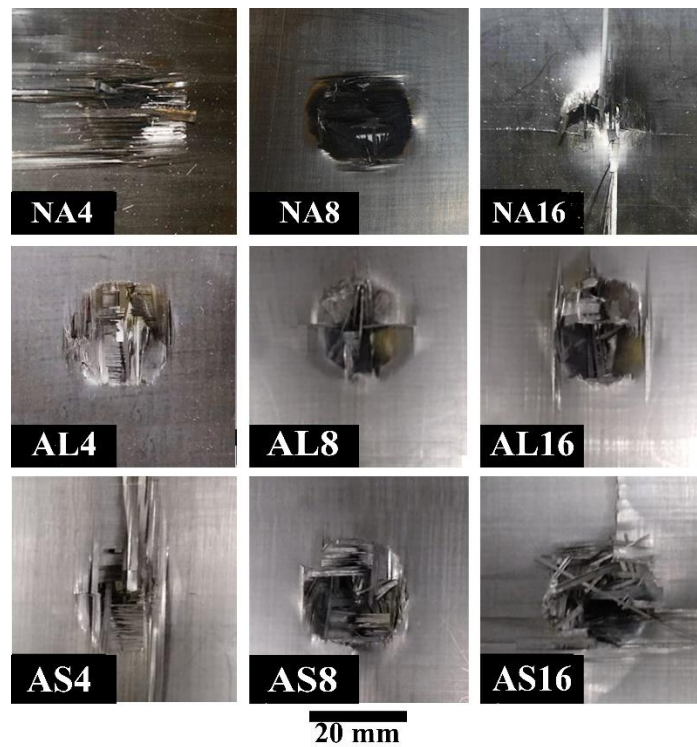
Fracture surfaces of the composite plates prepared with resin A
